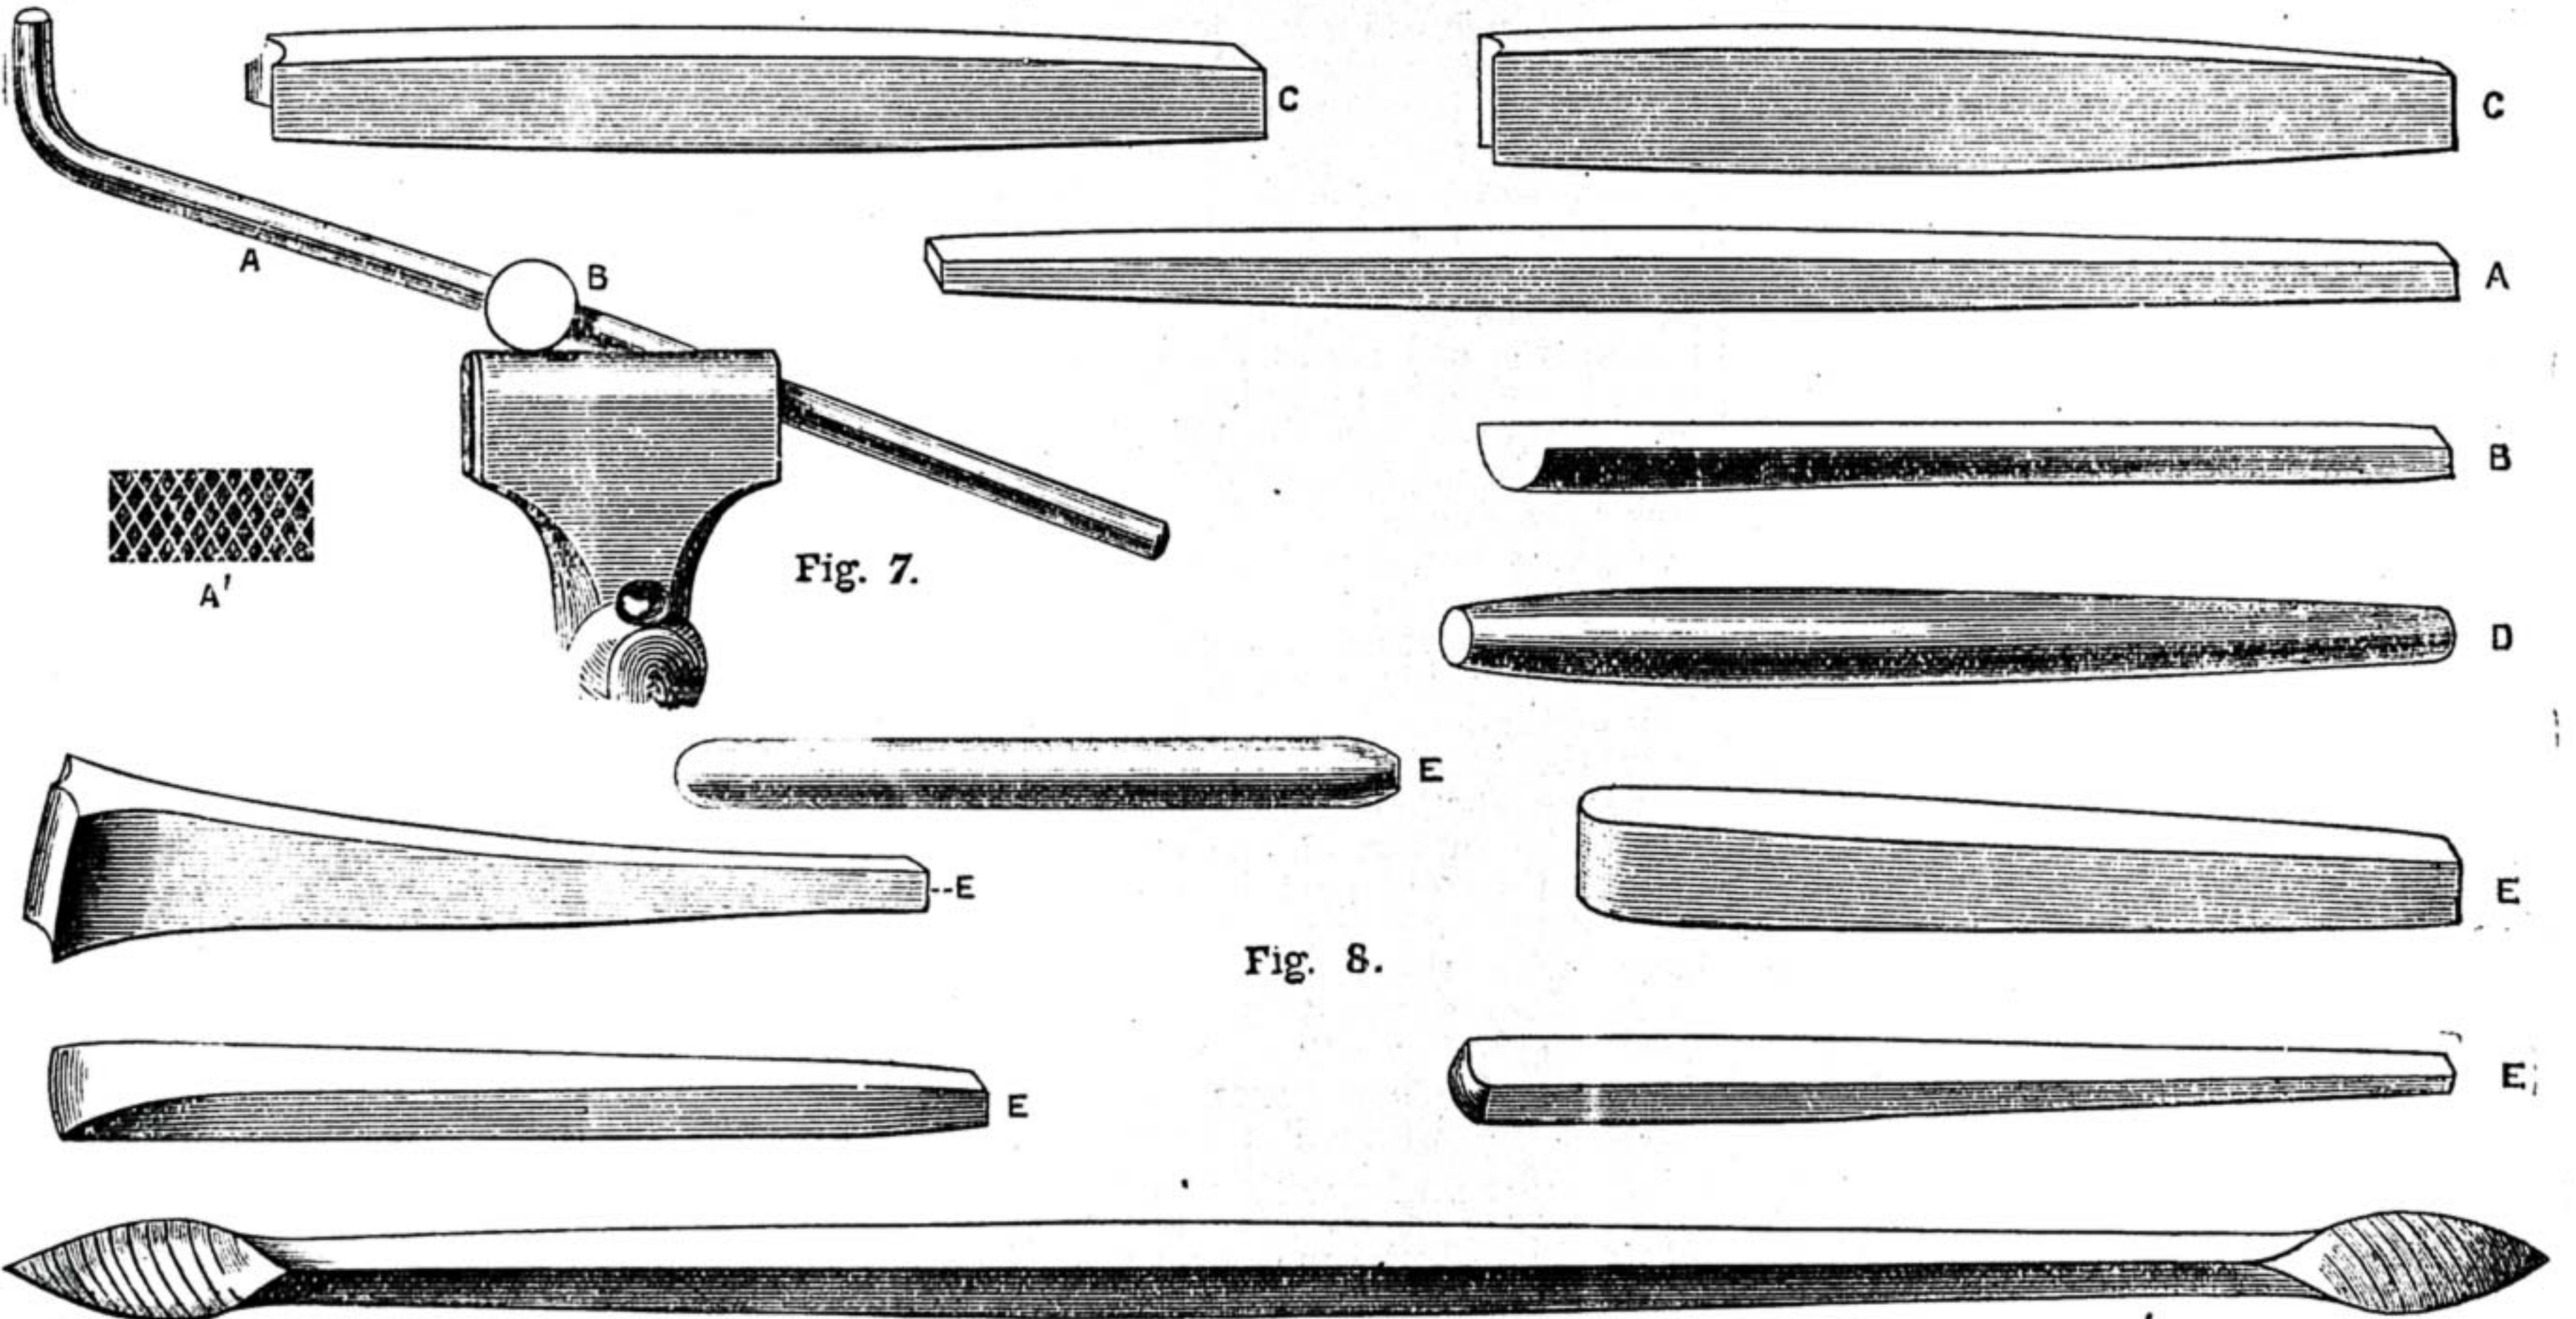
Snarling Iron fixed in Vice. Fig. 8.—Chaser's Tool: actual size—A, Matting Punch; A', End of ditto, enlarged; B, Cutting Punch; C, C, Fluting Punches; D, Beading Punch; E, E, E, E, E, Various shaped Punches; F, Riffler.
